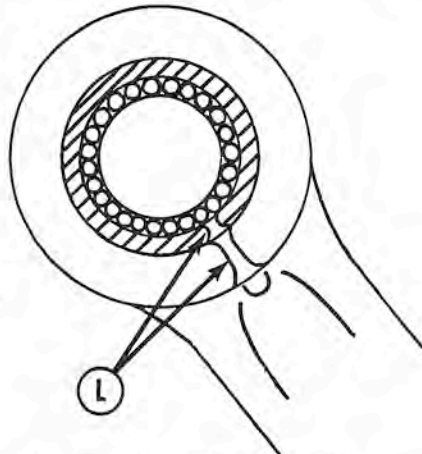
Install connecting rod upper bearing so that oil hole in bearing is aligned with hole in rod as shown at (L).
